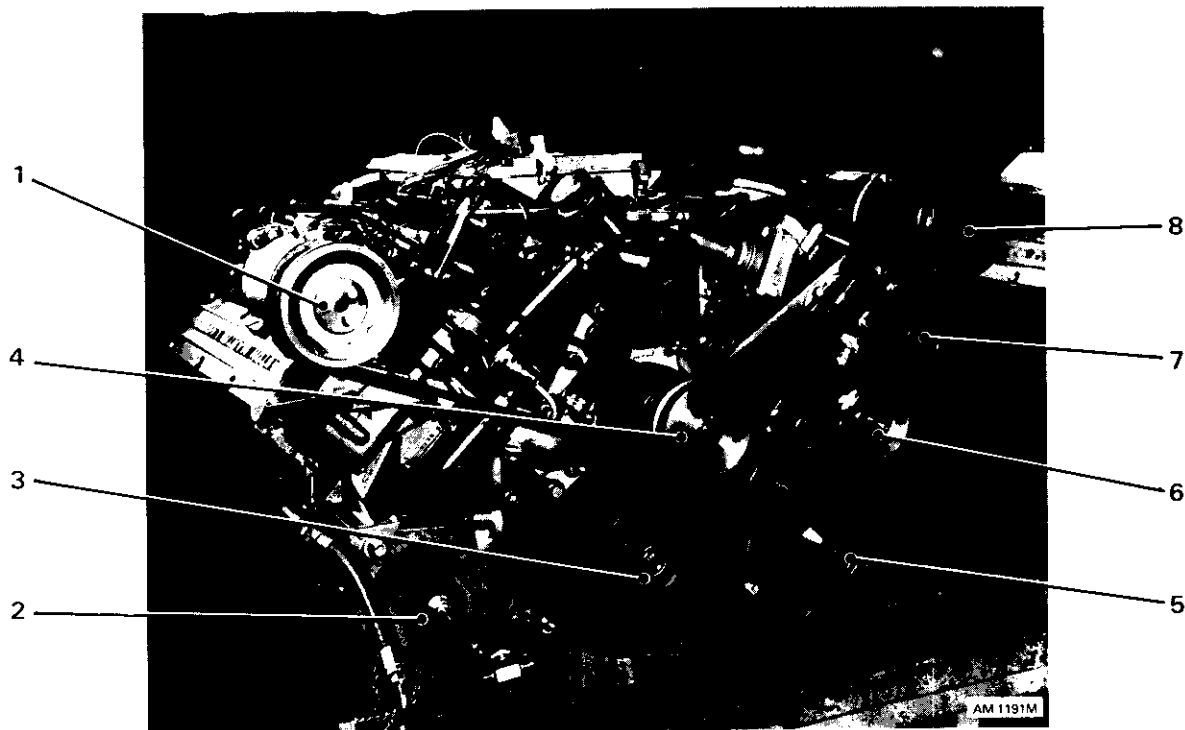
Typical arrangement of auxiliary drive belts
